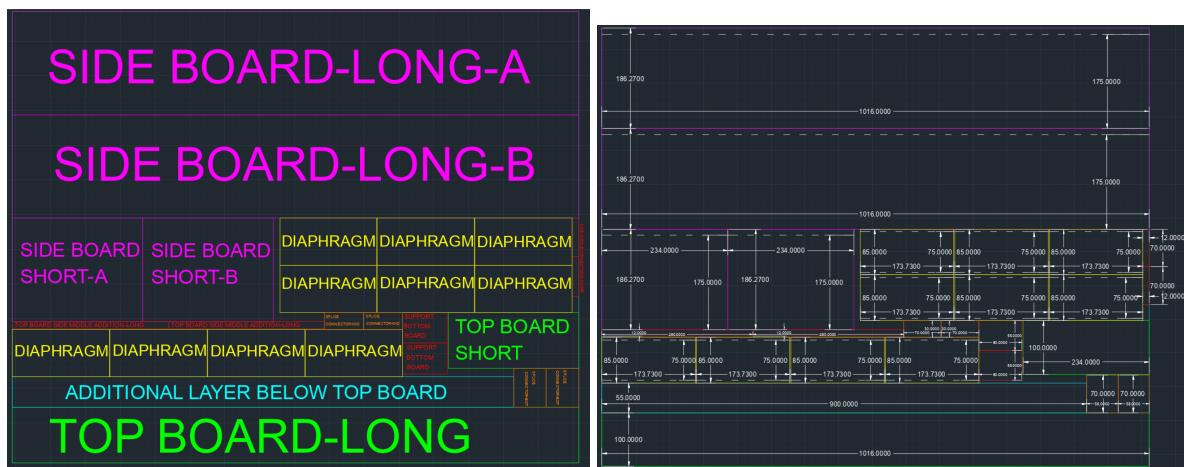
, 2. AutoCad Drawing of how to divide the matboard
